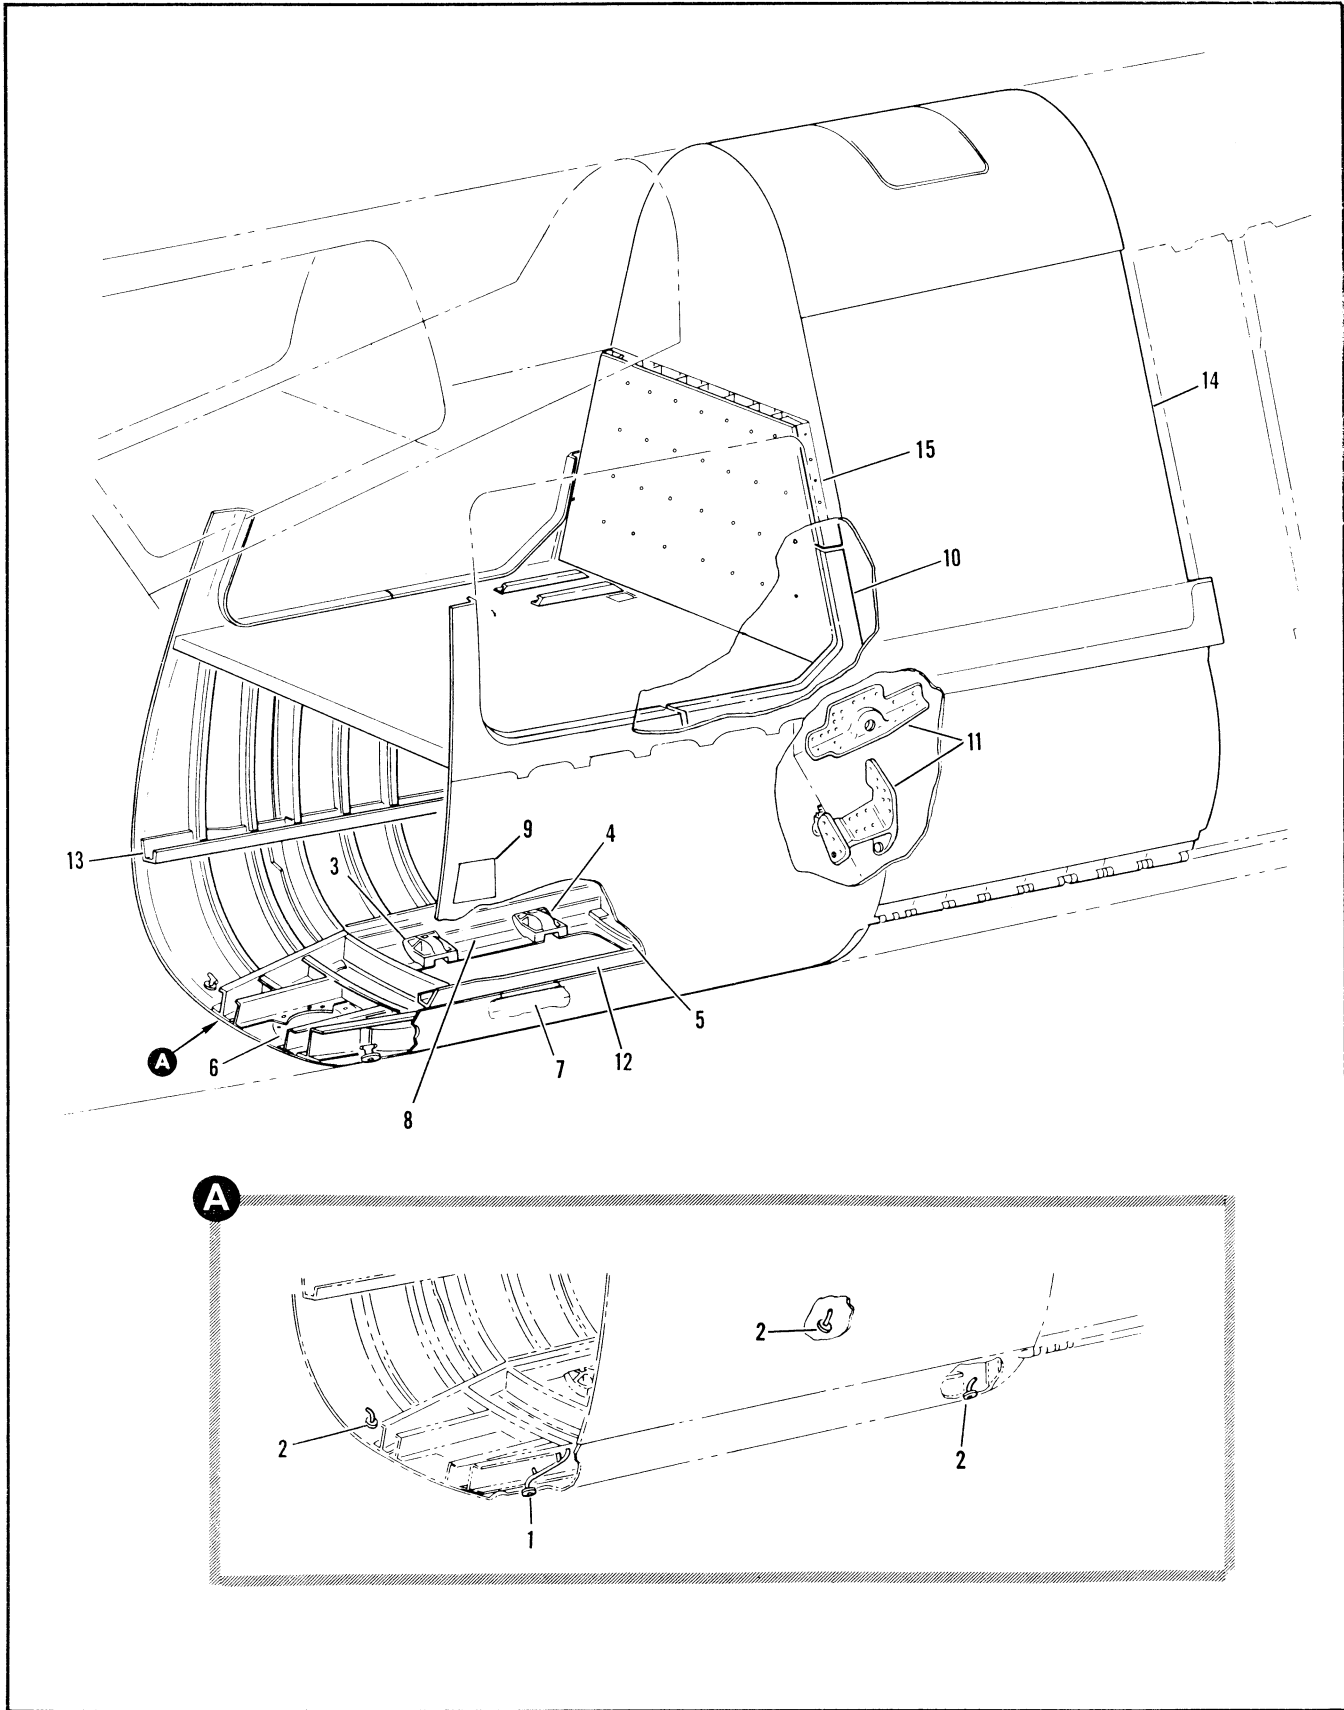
Lower Barrel Assembly Sta 166 to 253
